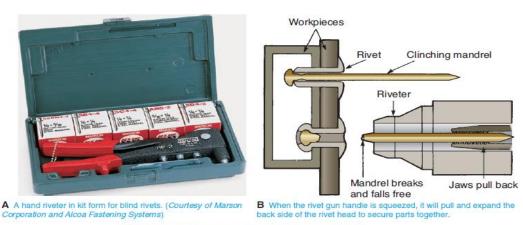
Note how rivets can hold two panels together. Factory-installed rivets are becoming common again.
